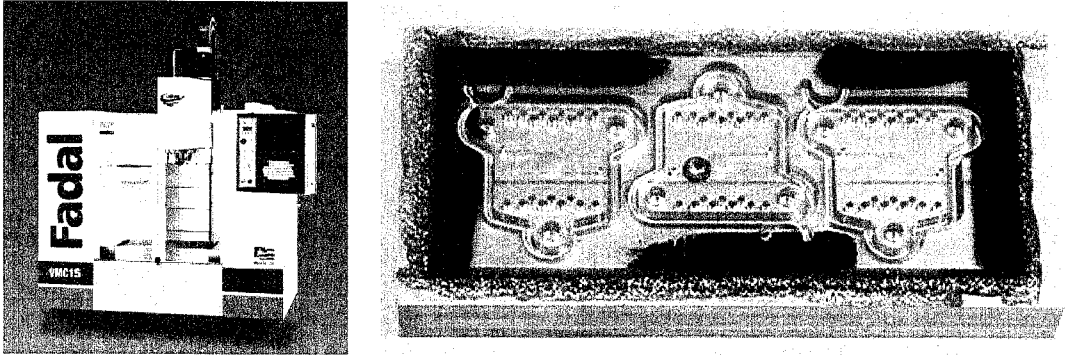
The vertical machining center (VMC) used for fabricating chamber prototypes along with the fixture used to hold the acrylic during machining.
